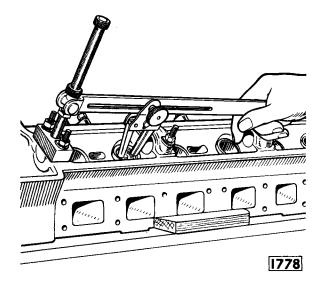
Fitting the valve springs utilising the valve spring compressing tool (Churchill Tool No. J6118)
